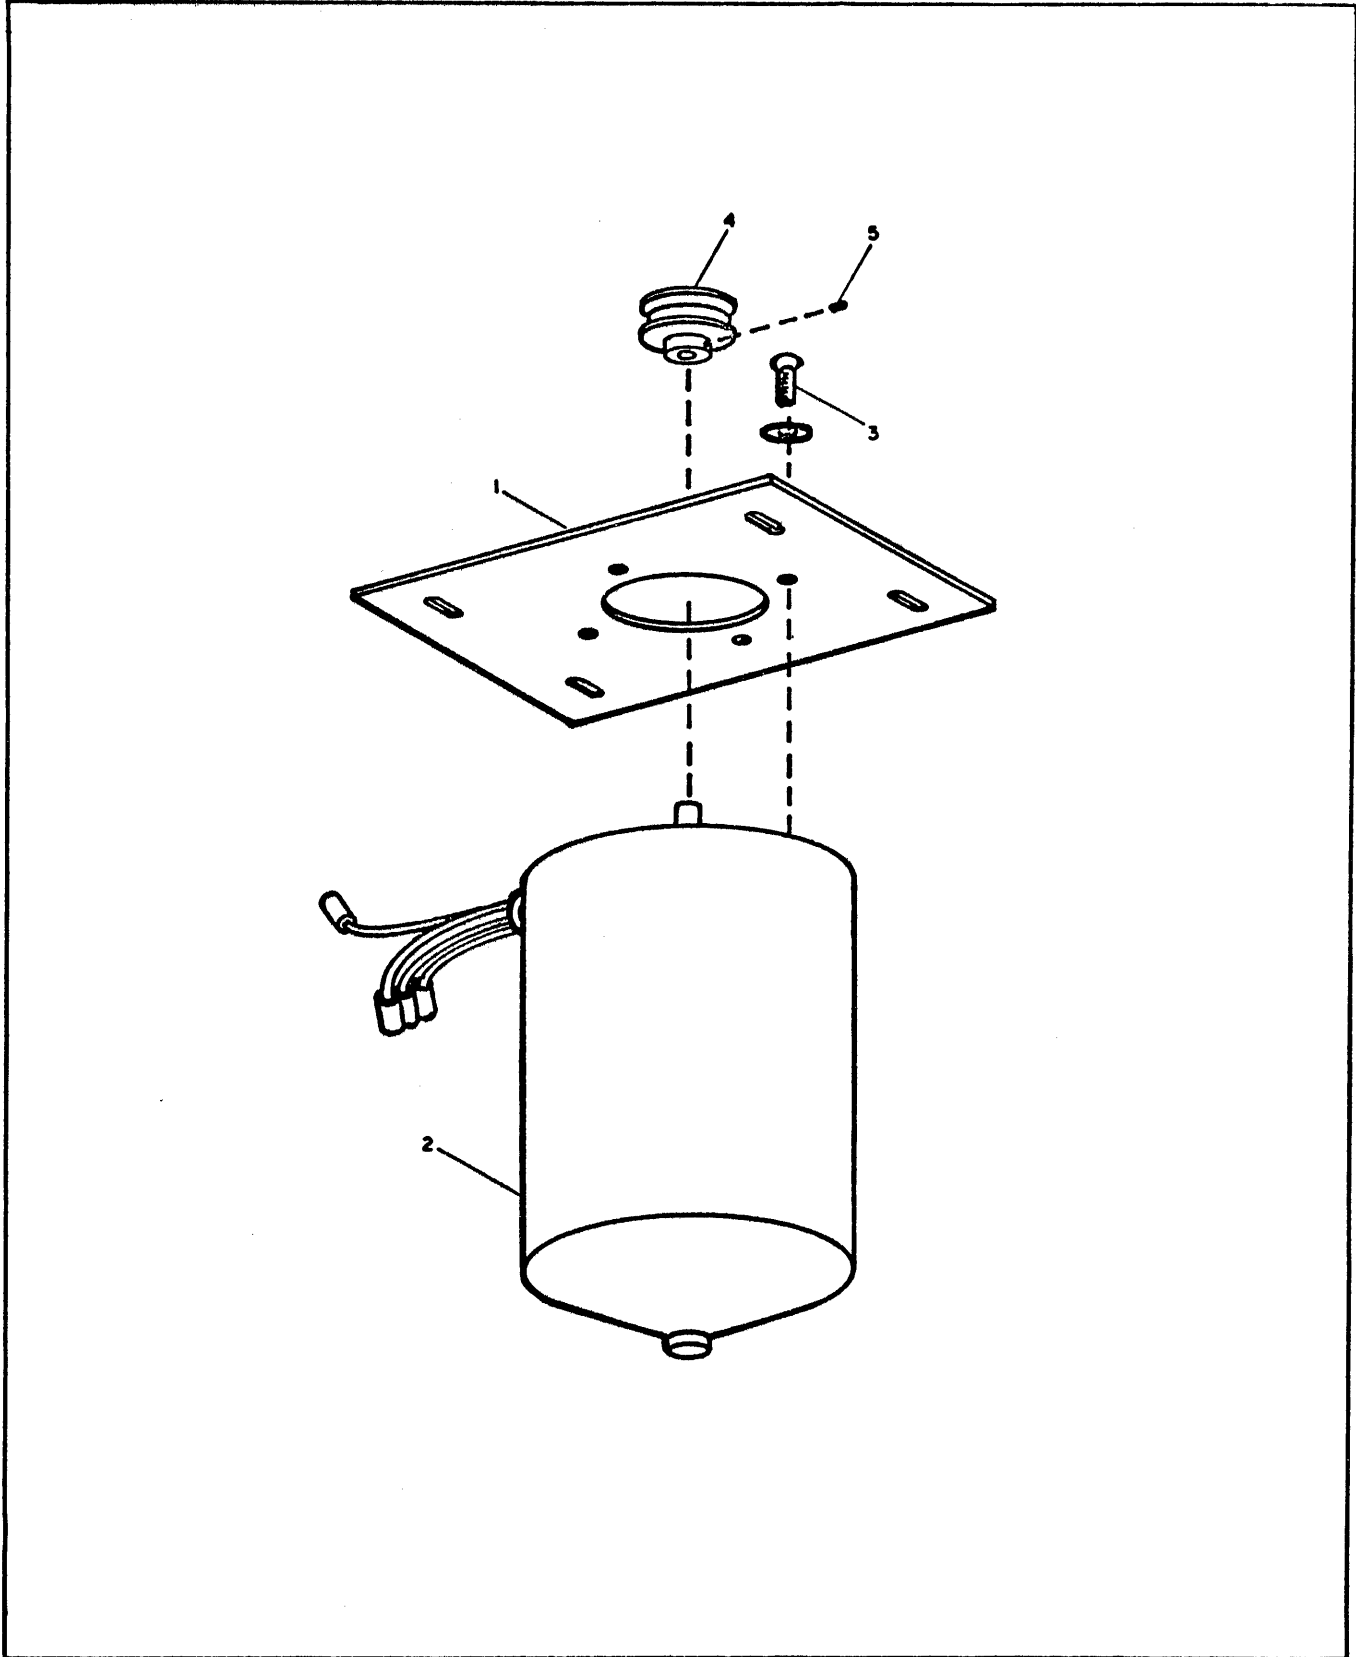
DRIVE MOTOR ASSEMBLY
